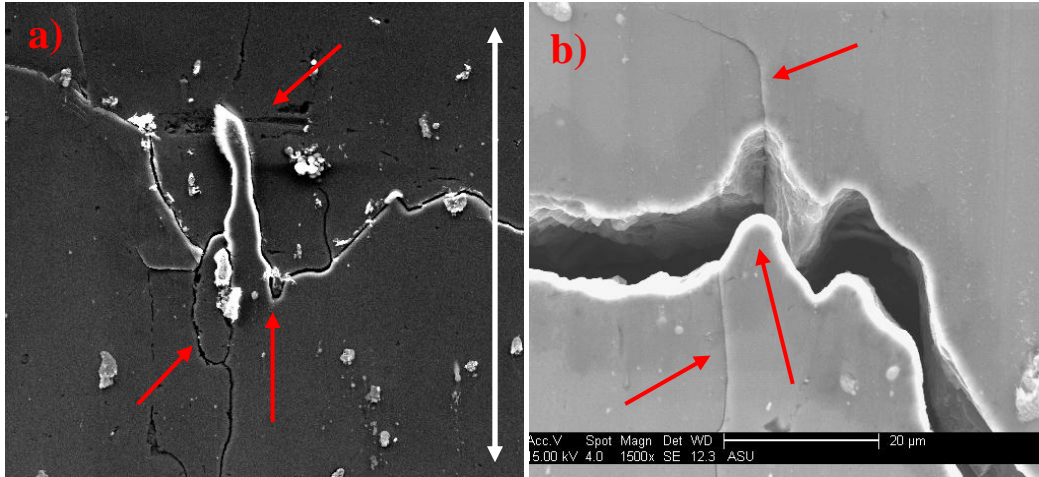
Casting defects (identified by red arrows) responsible for the failing crack in samples a) 5L and b) 4T. Arrow shows the loading direction.
